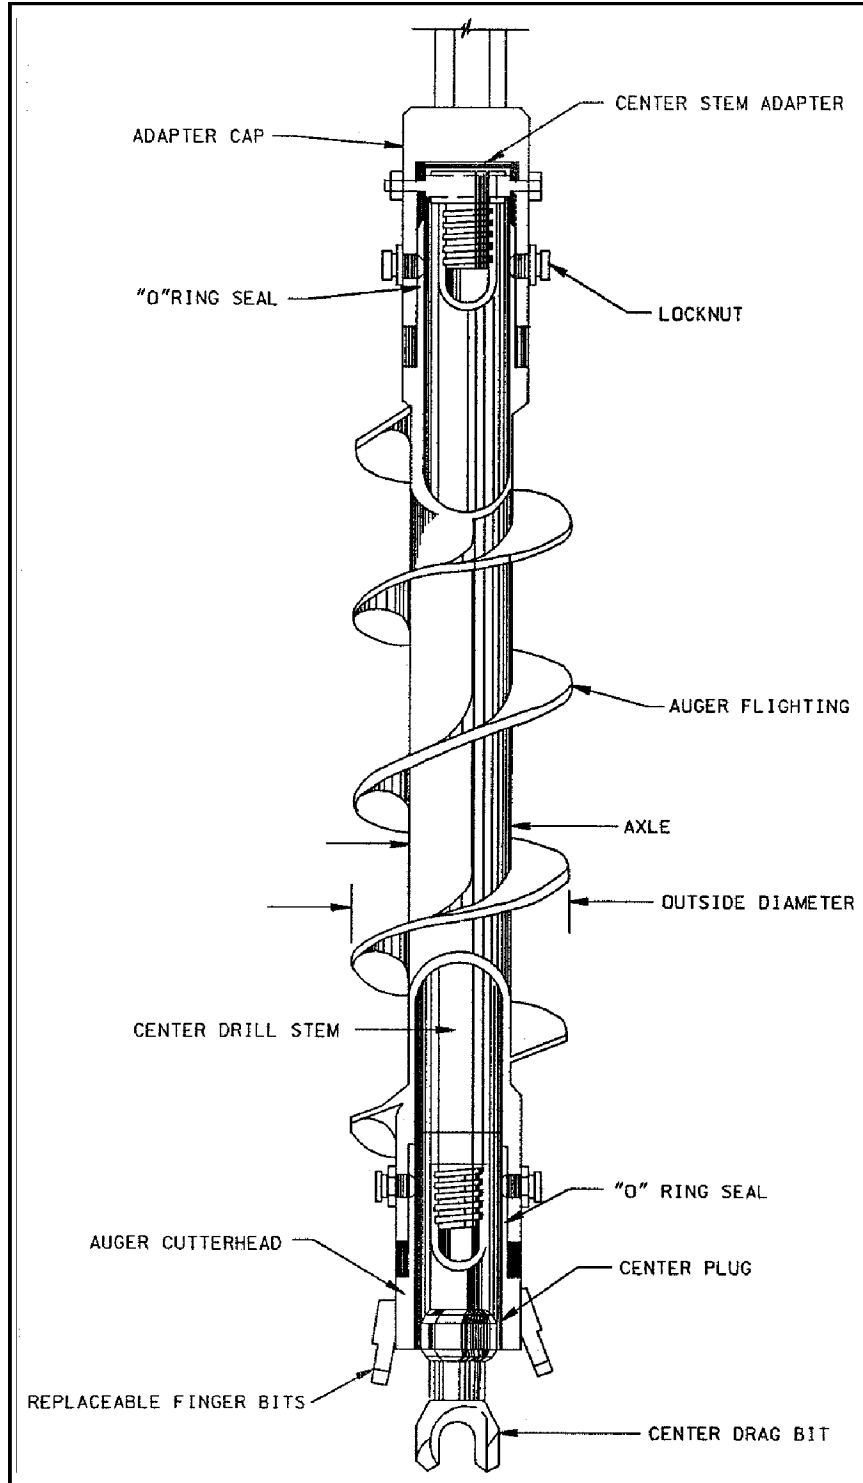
Isometric drawing of the hollow-stem auger with the center drag bit which can be used with soil sampling devices (after Acker 1974)
